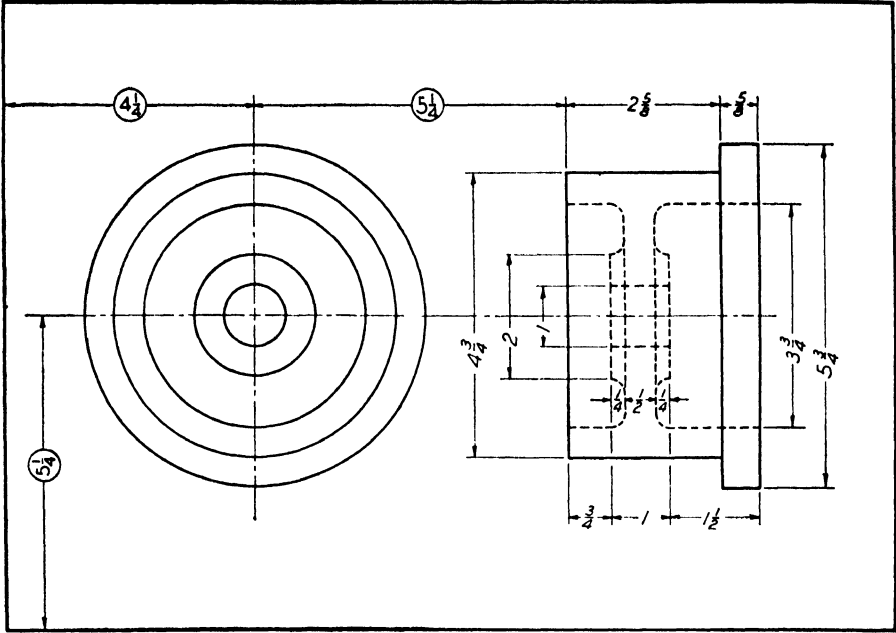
Prob. 143. Make a two-view drawing of the *water piston body*, showing the right-hand view as a half-section. Read Art. 6-4.
